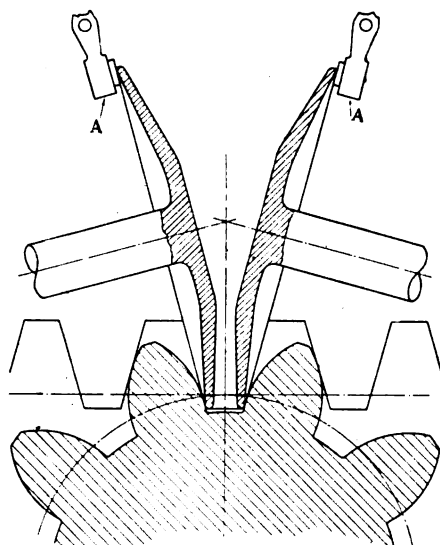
Diagram showing the disked wheels used in Maag gear grinding machine.
